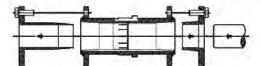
Short Shaft Bushing and Output Hub Assembly
